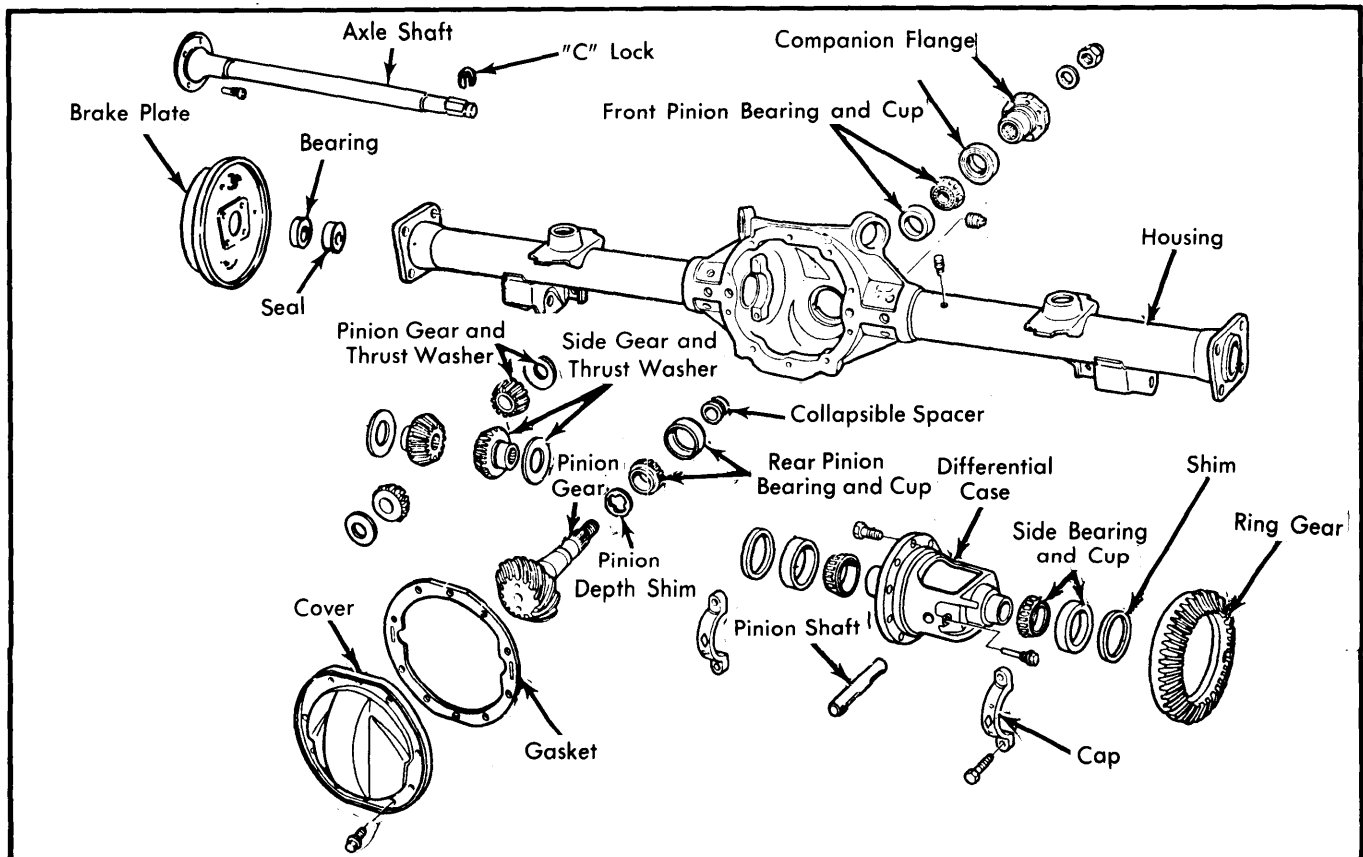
Exploded View of General Motors Integral Rear Axle Assembly (Exc. Corvette)
